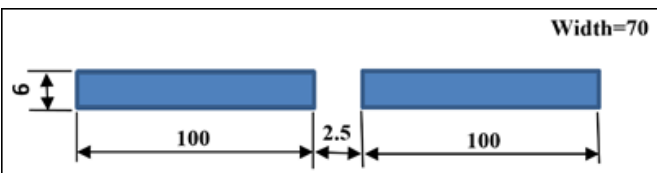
Dimensions (mm) of the plates to be welded
